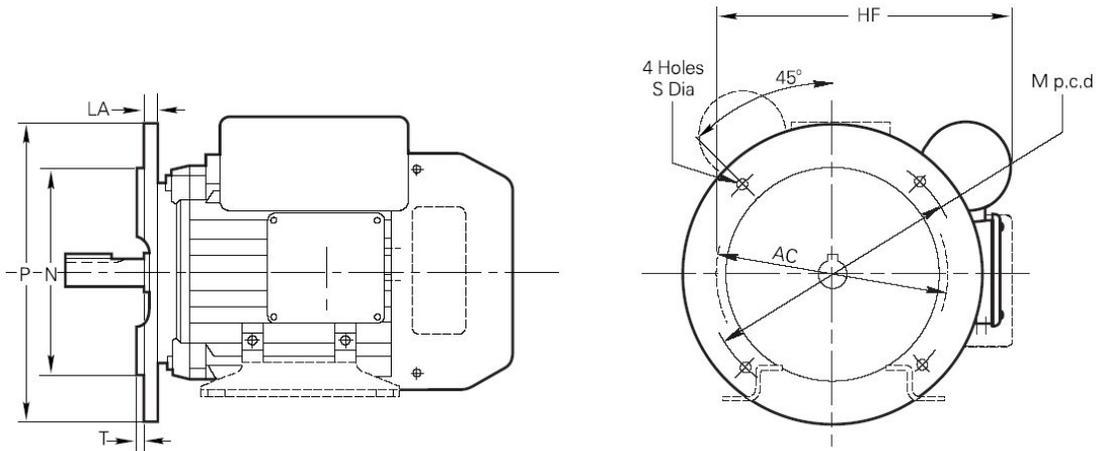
Flange mounted motor B5 (B3/B5 or B35)
